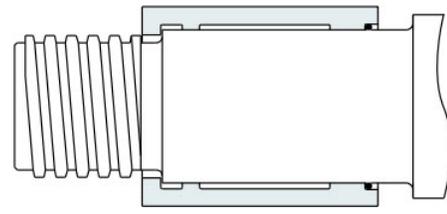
Hook Type Shaft Sleeve Arrangement
